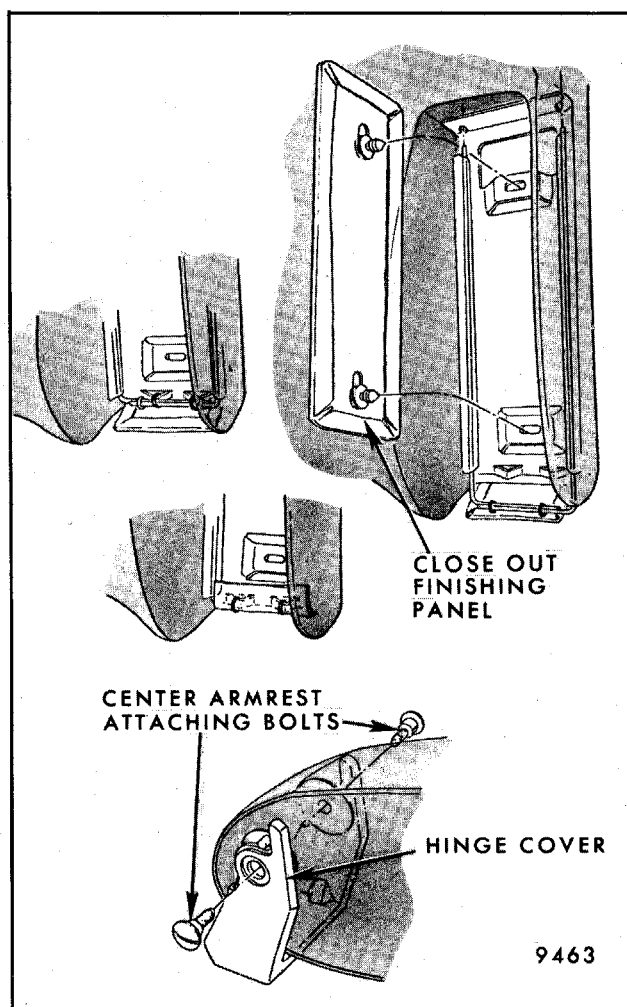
Front Seat Center Armrest and Hinge Support - "B and C" Styles - 50-50 Passenger and Driver's Seat
